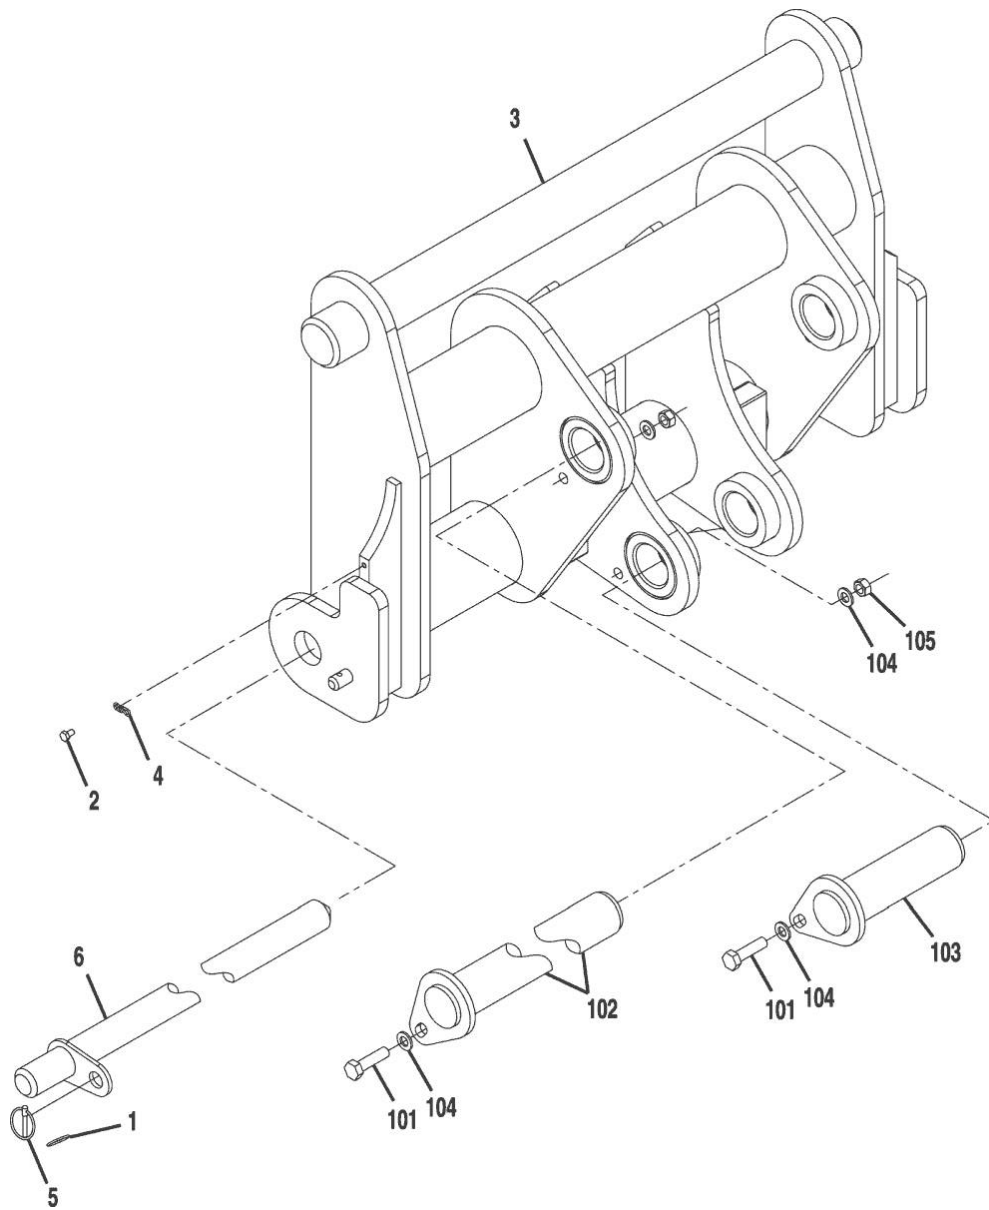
QUICK SWITCH ASSEMBLY
